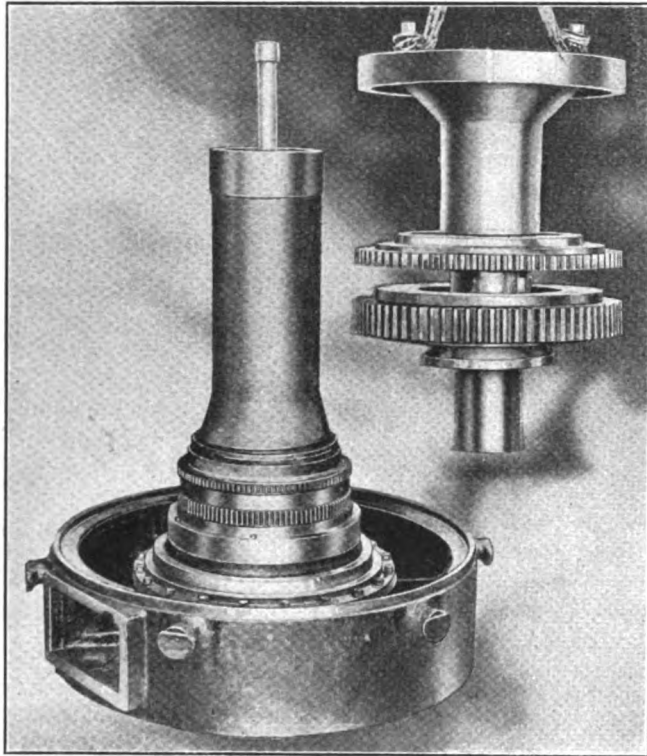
COLUMN AND ONE TABLE SPINDLE
